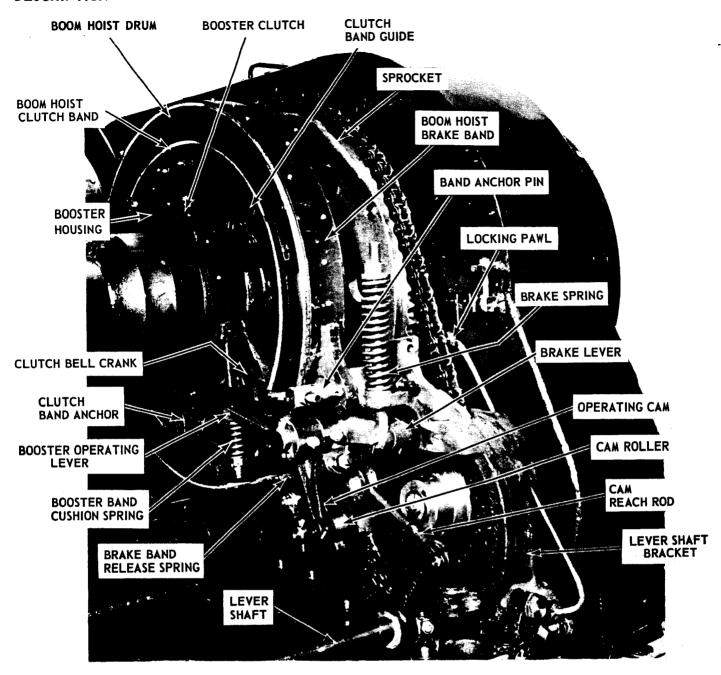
The Boom Hoist and Booster Clutch Assembly
